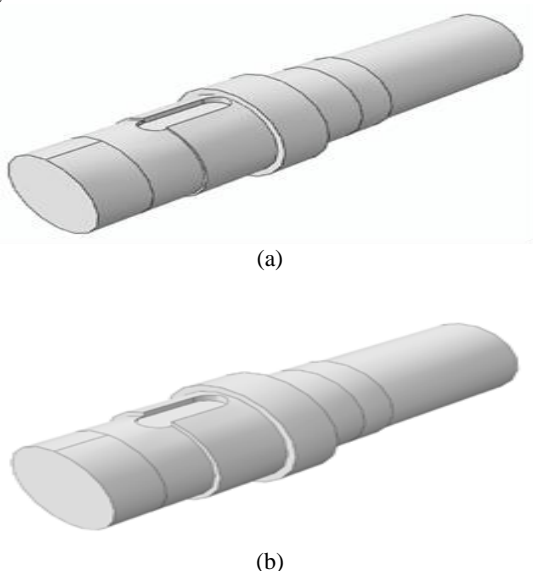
3D model of (a) old shaft (shaft No. 1), (b) the redesigned shaft (Shaft No. 2)
